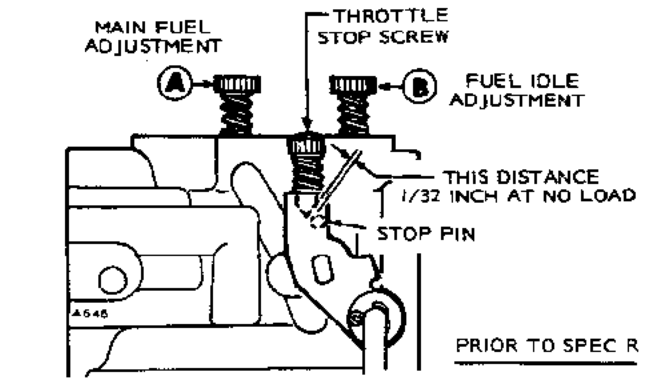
ADJUSTING GASOLINE CARBURETOR
